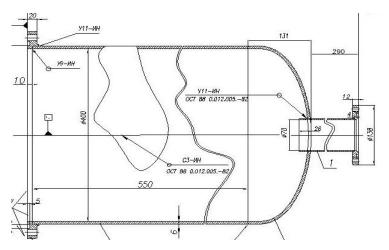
The working drawing of the Al cylindrical part of ACTAF2 pressure vessel.
